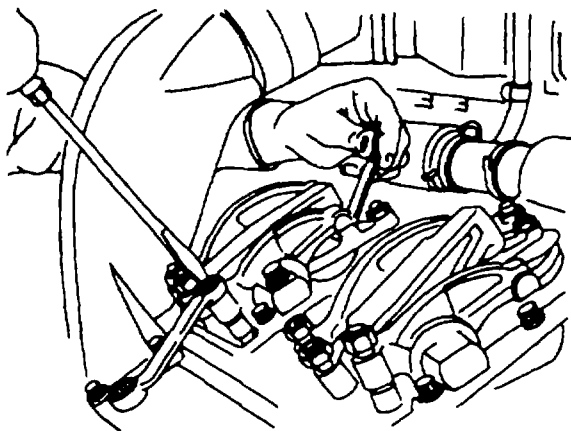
Adjusting Valve Rocker Lever Clearance
